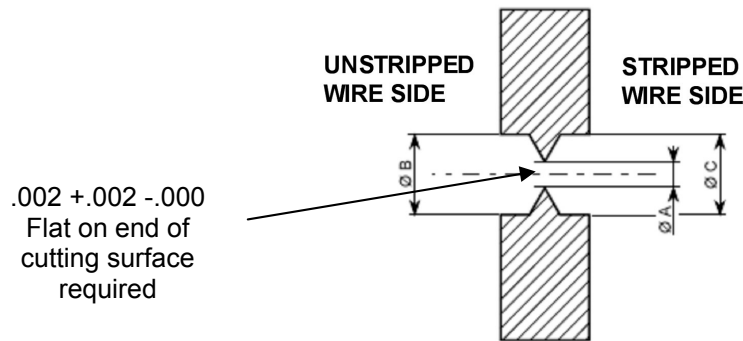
DIMENSION REQUIREMENTS FOR SPLIT BLADE ACCESSORIES
